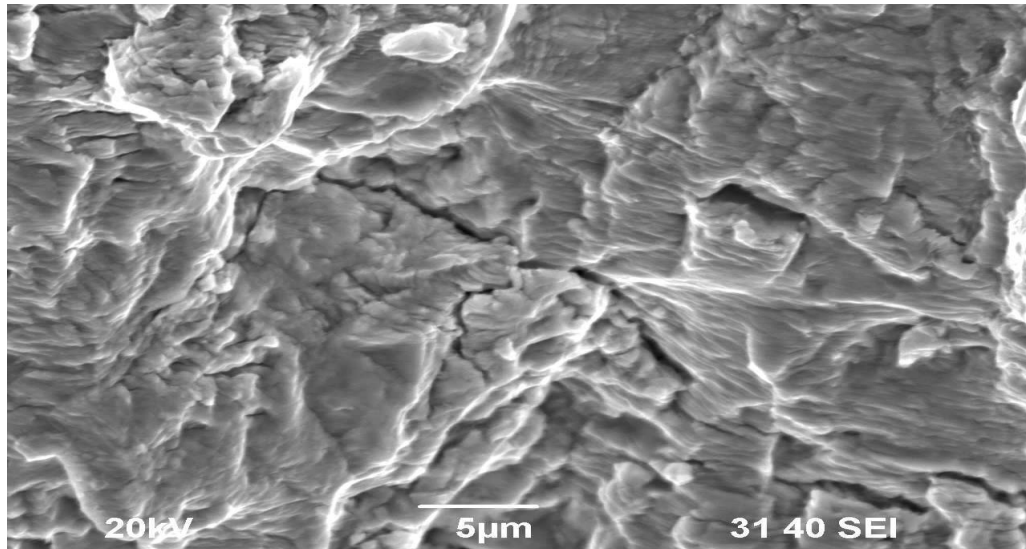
Presence of fatigue striations near the fatigue crack in I.F. steel for the (I.F. steel on top + Aluminium 5182 bottom)
